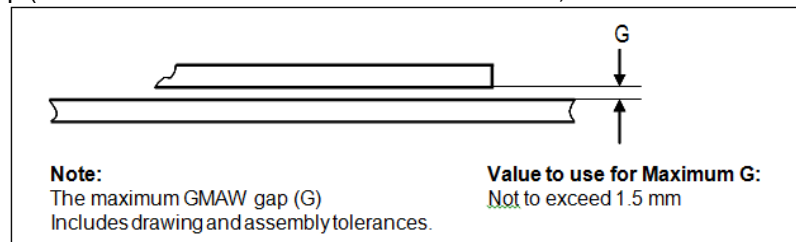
G-8: Maximum GMAW welding gap.^{A-12}
